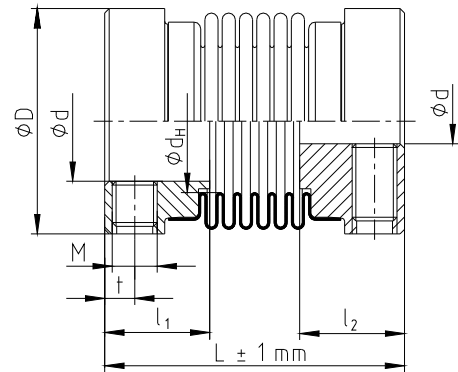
TOOLFLEX® type M with thread for setscrew (type 1.1)
